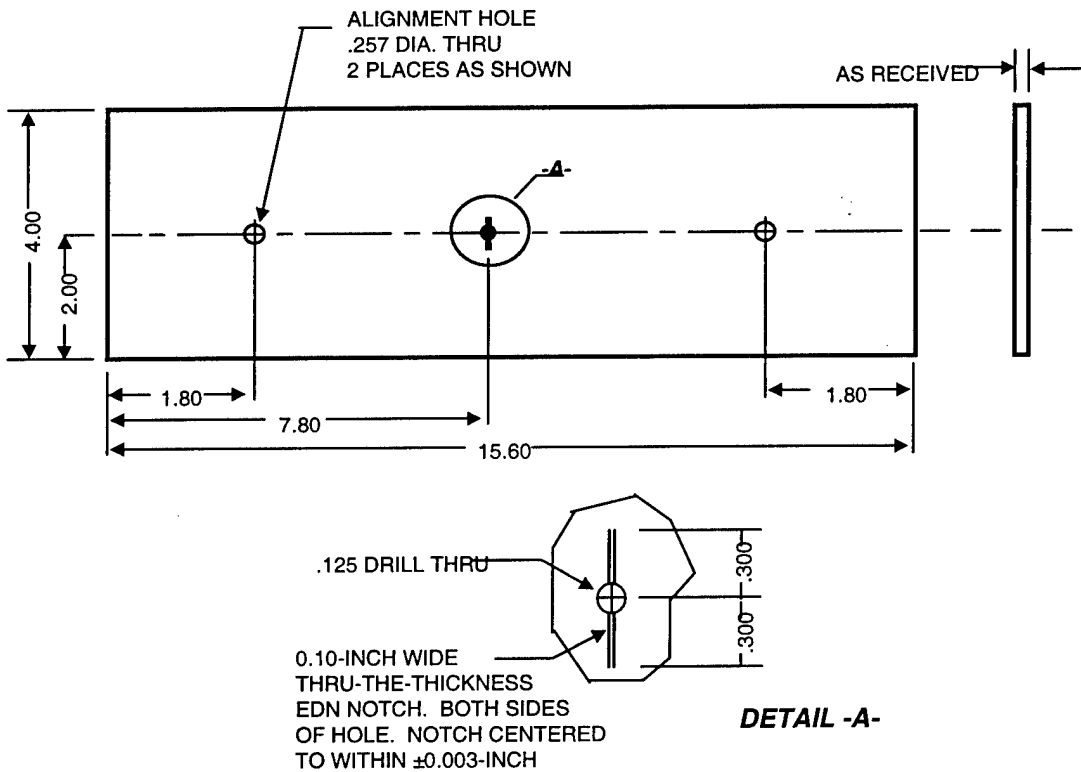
Drawing of M(T) Fatigue Crack Growth Rate Specimen
